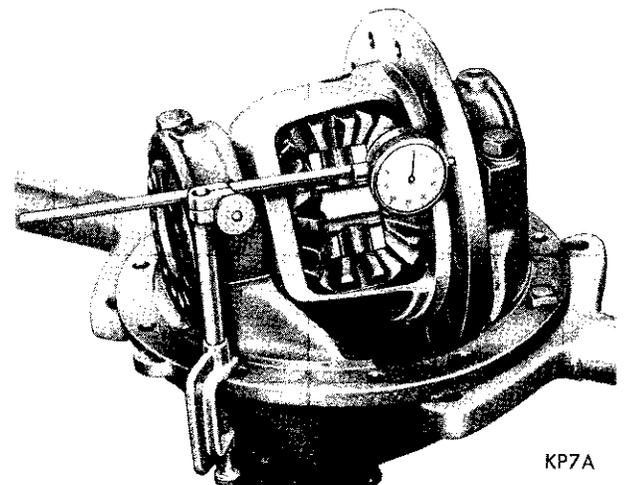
Checking Drive Gear Mounting Flange Face Runout
